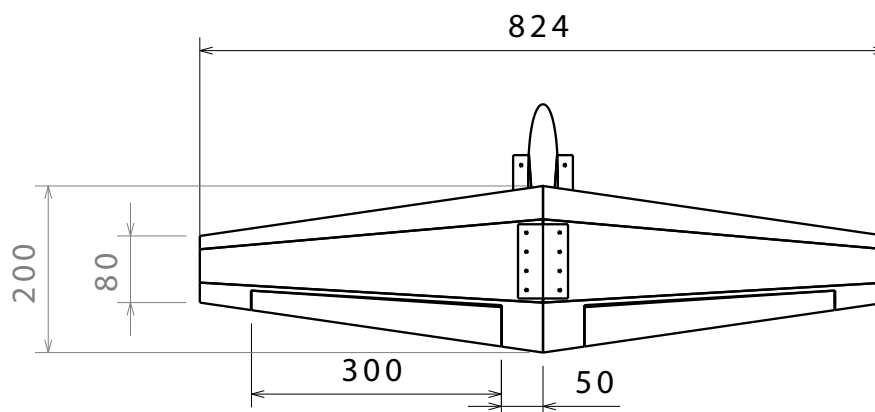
Top view of the horizontal stabiliser. Dimensions are in mm.
